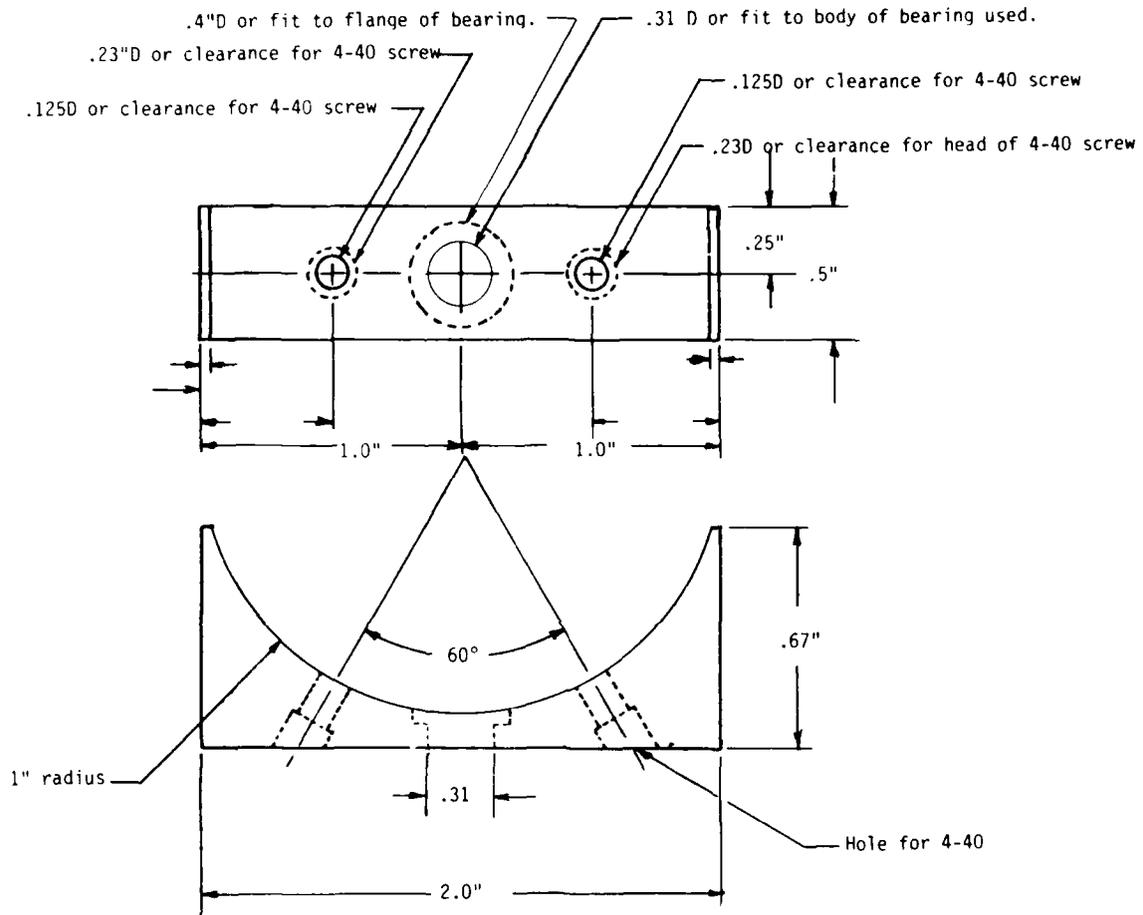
Chopper stabilizer; unless otherwise specified, tolerances are  $\pm .002$
